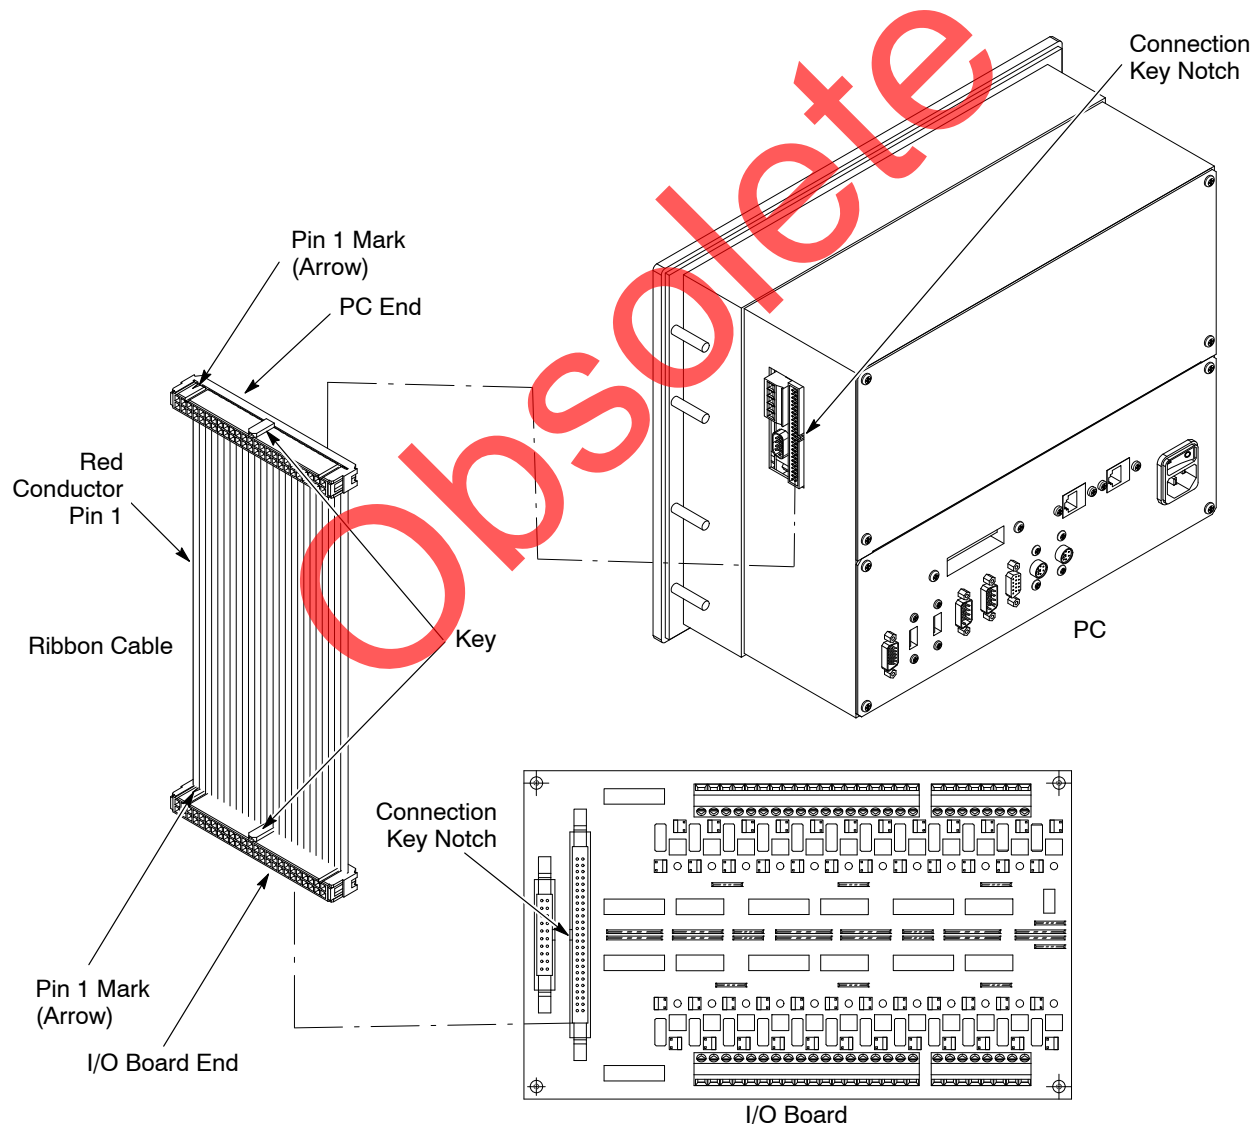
PC-I/O Board Ribbon Cable Connections
